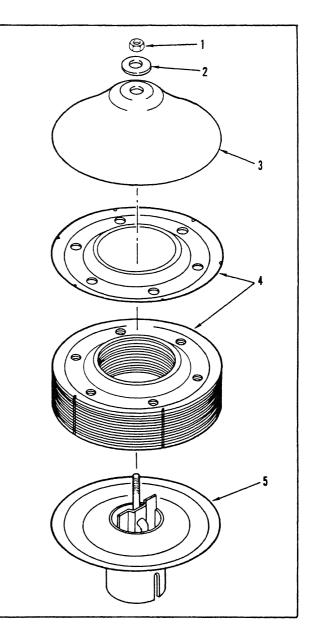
Spark, Arrestor, Assembly/Disassembly
